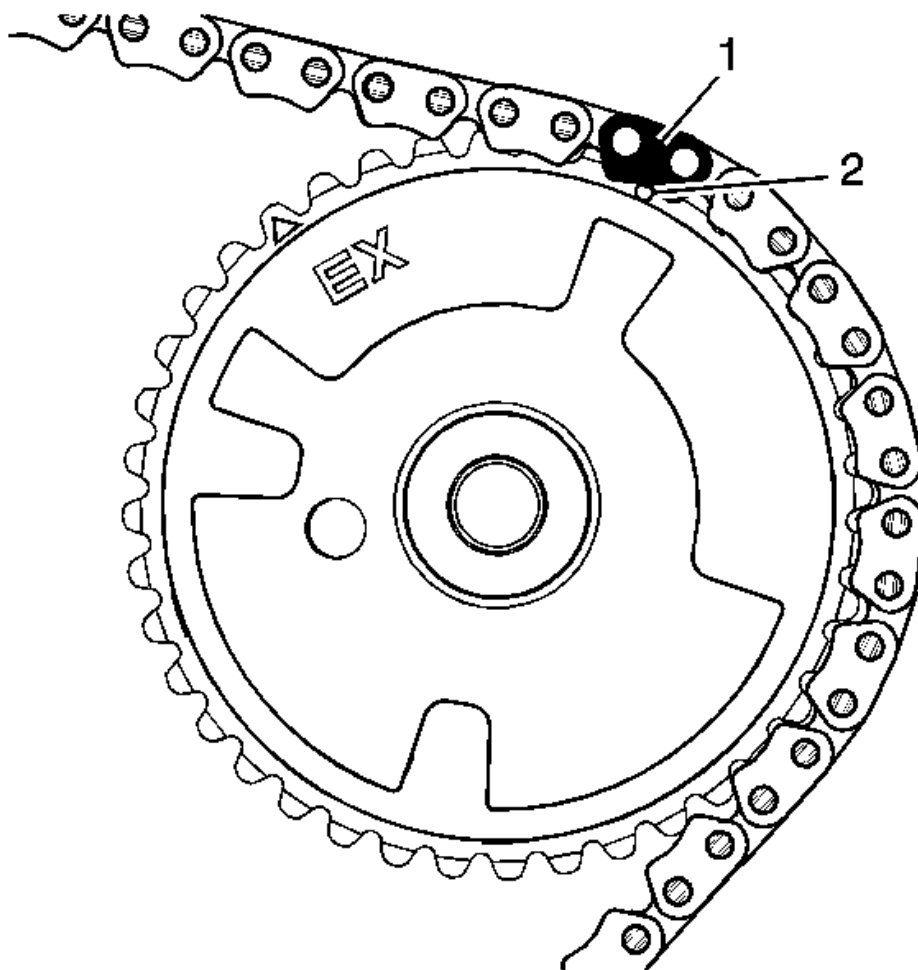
View Of Timing Camshaft Drive Chain Link And Alignment Access Hole
